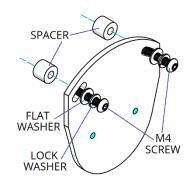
Angle sensor mounting details for Seakeeper 2 & 3
